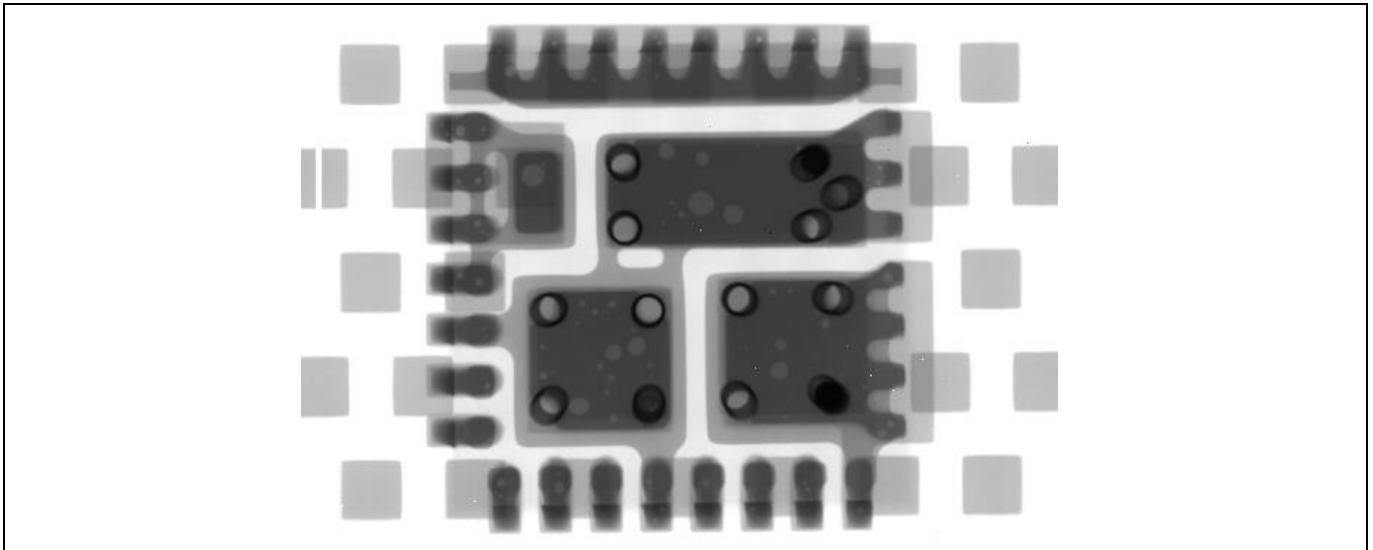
Typical X-ray image of a soldered IQFN package. Investigations have shown that voids similar in size and amount to those shown in this image do not reduce the package reliability.
